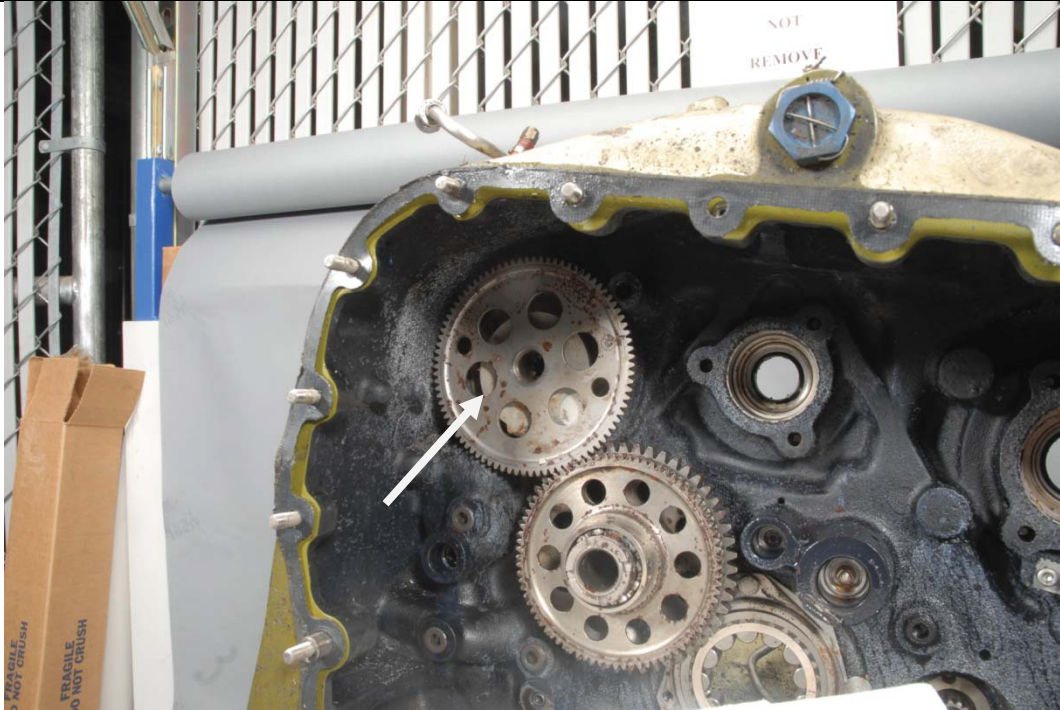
P-79297C, Compressor Air/Oil Carbon Seal Rotor, FLA
